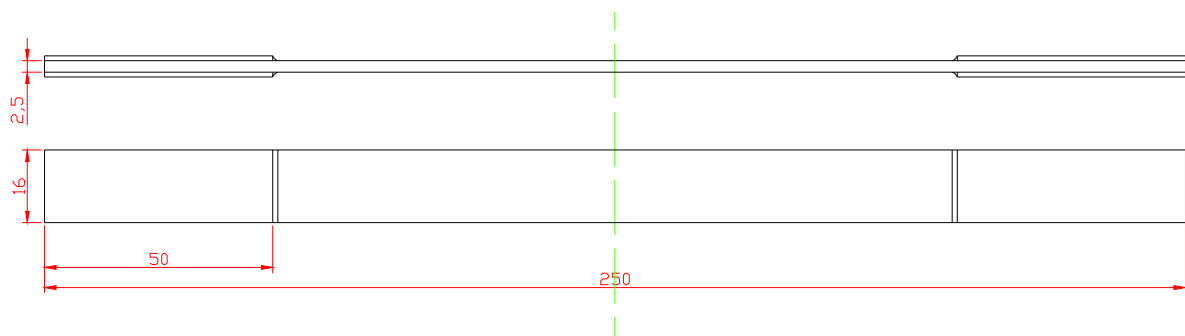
Specimen geometry of coupons used in quasi tension test of cross ply laminates.
